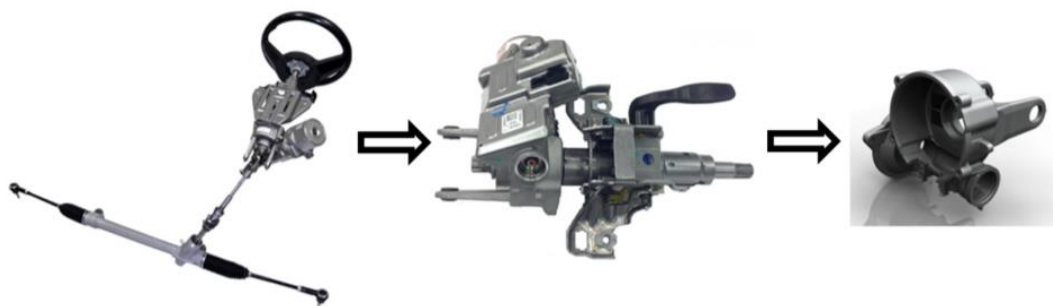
The power steering system with a separated geometrical form of the worm drive gear housing.
